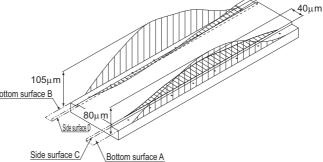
Surface Accuracy of the LM Guide Mounting Base (Milled Surface Only)
